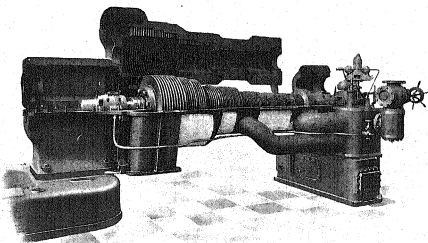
1000-kw. Parsons-Willans Steam Turbine, with upper casing hinged back to expose the rotor
